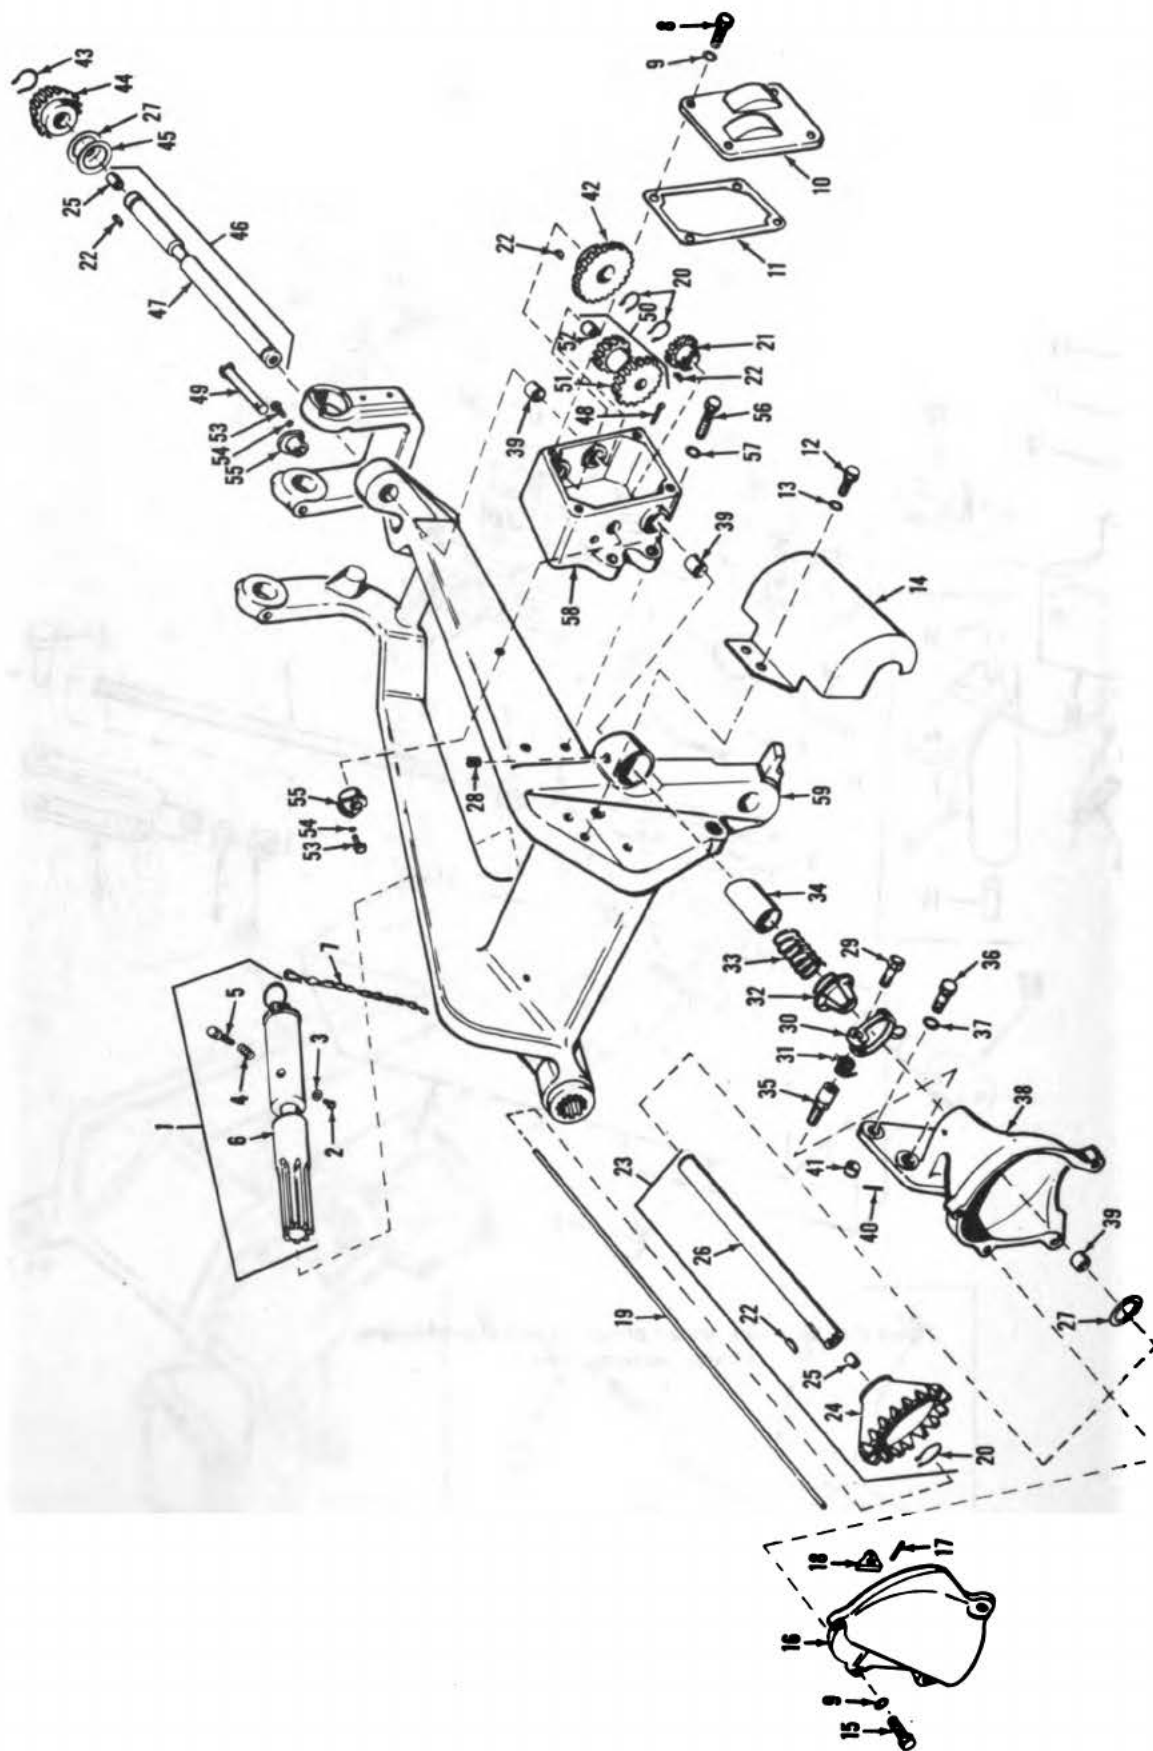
Mount, machine gun (M48 tank cupola)—partially exploded view.
